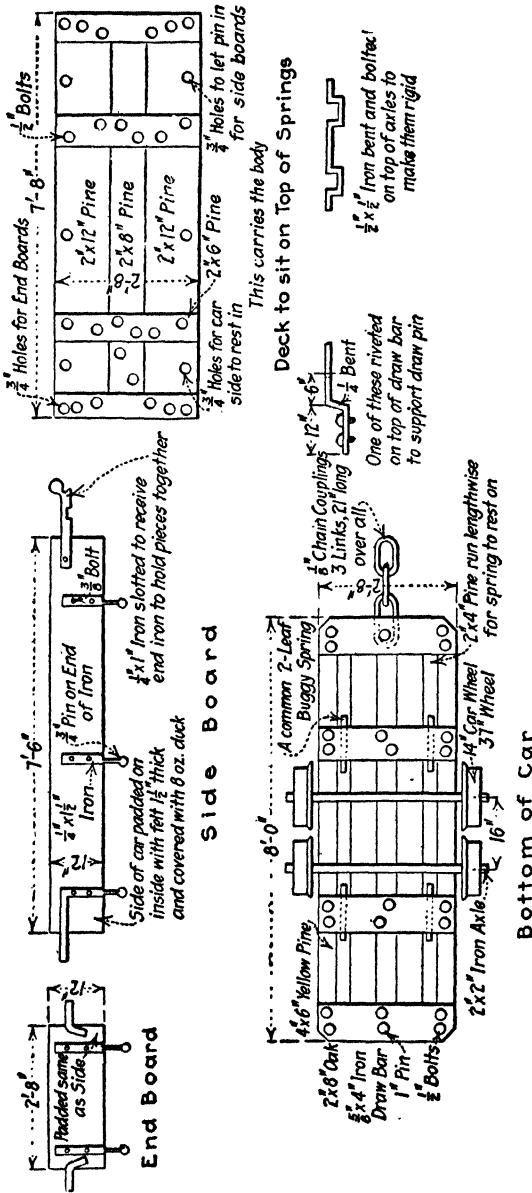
Detail of side board, end board, bottom and stretcher deck bottom of car.
